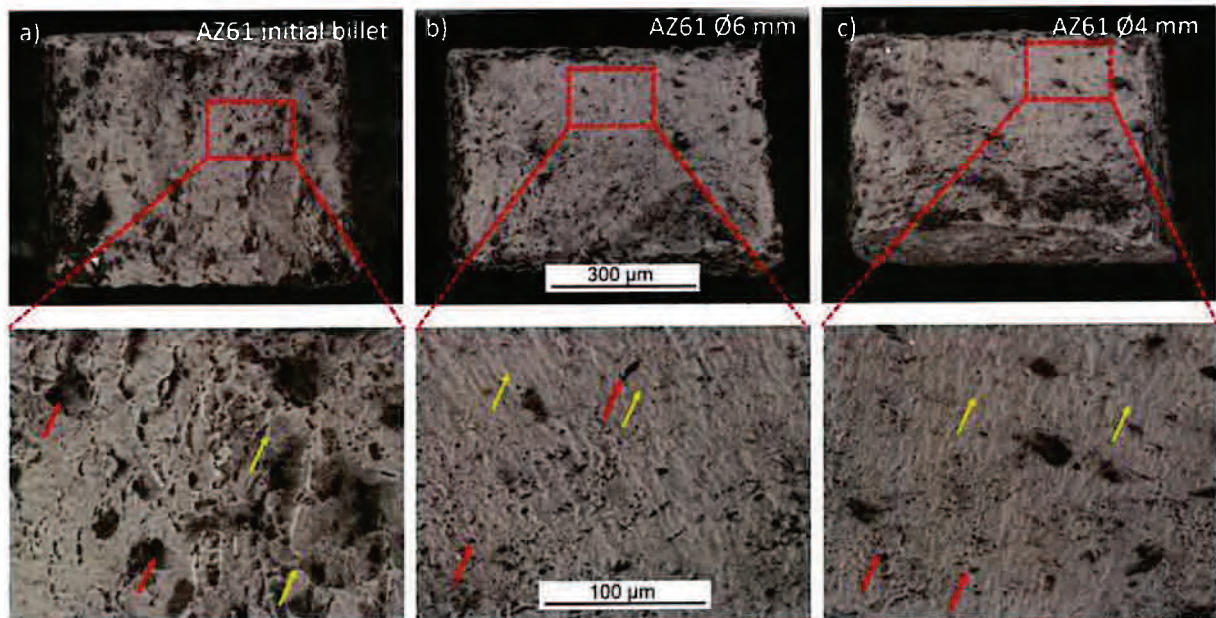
Fracture surfaces of the AZ61 alloys: a) initial billet, b) KoBo extruded to Ø6 mm and c) KoBo extruded to Ø4 mm. Dimples are marked by the red arrows, and facets typical for brittle fracture are marked by the yellow arrows.
